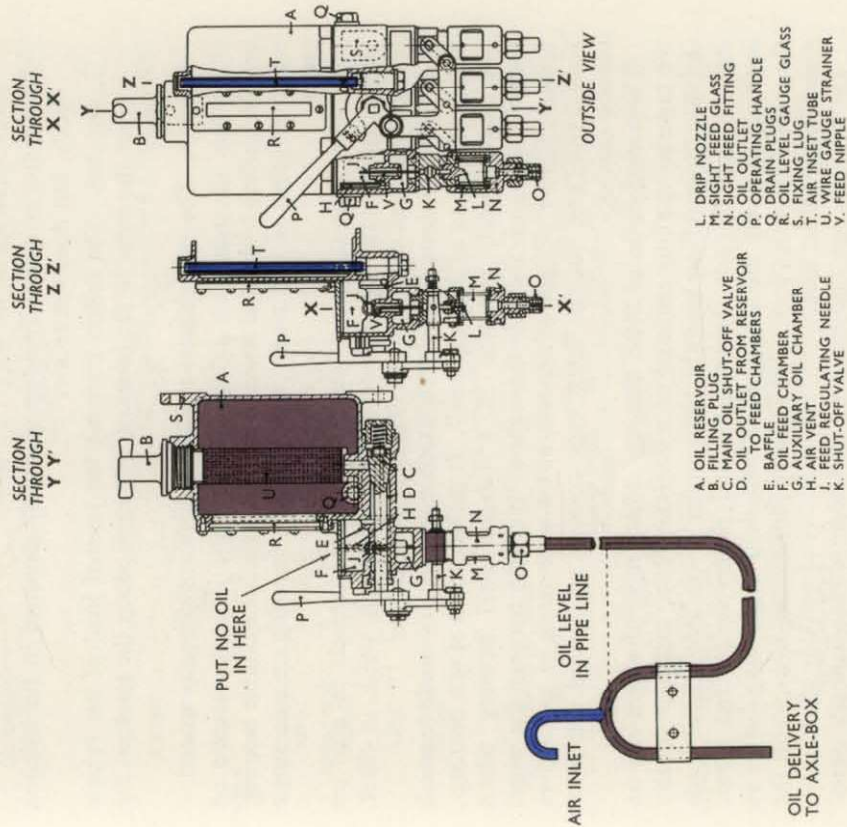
FOUNTAIN-TYPE AXLEBOX LUBRICATOR
